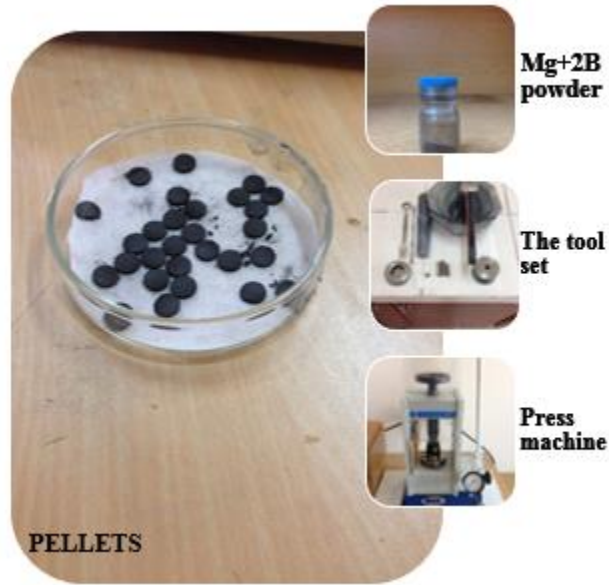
Mg+2B pellets and production units of hydraulic press and die.
